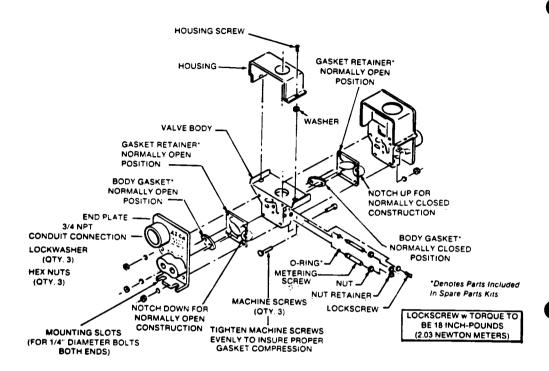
DISASSEMBLING 3-WAY SOLENOID VALVES.
